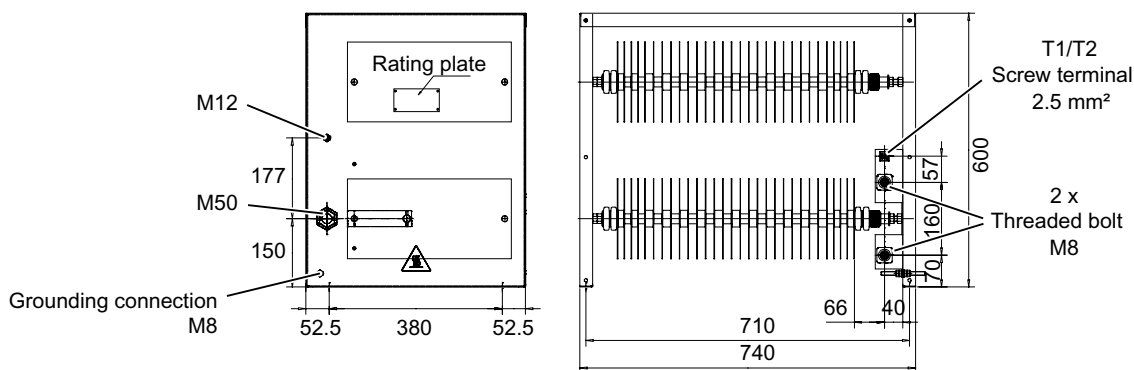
Dimension drawing for braking resistor 25 kW, 125 kW (option L61 / L64)
